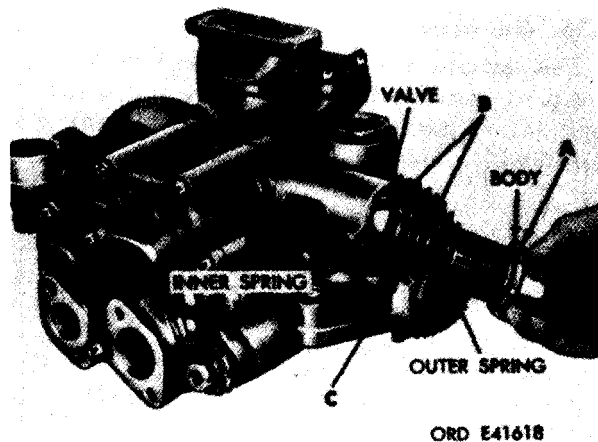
Removing or installing locking wire securing oil pump pressure relief valve and piston cooling control valve bodies.
